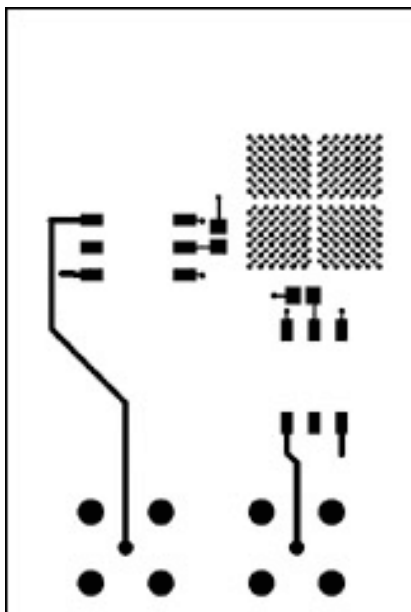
DS3151 Single-Port, T3/E3 LIU Layout—Copper Layer
